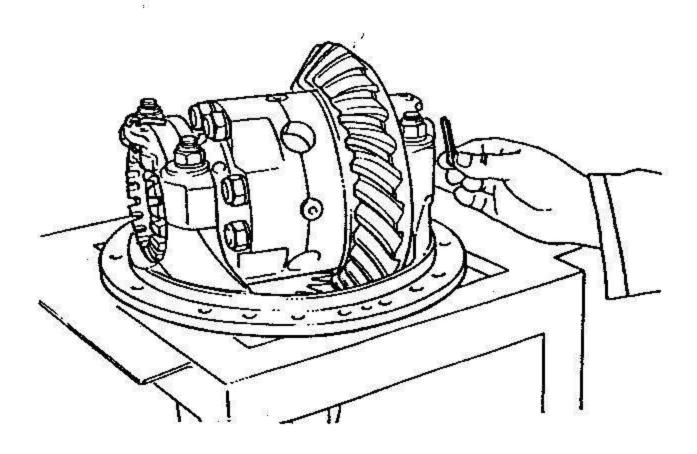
SETTING THE CROWN WHEEL BEARINGS
